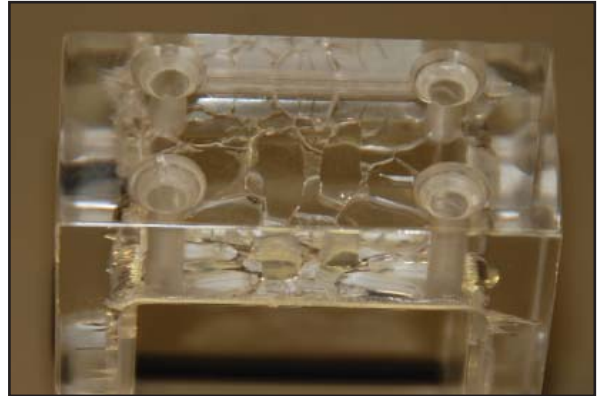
Over Tightening Screws Will Cause Cracks in Acrylic Material
